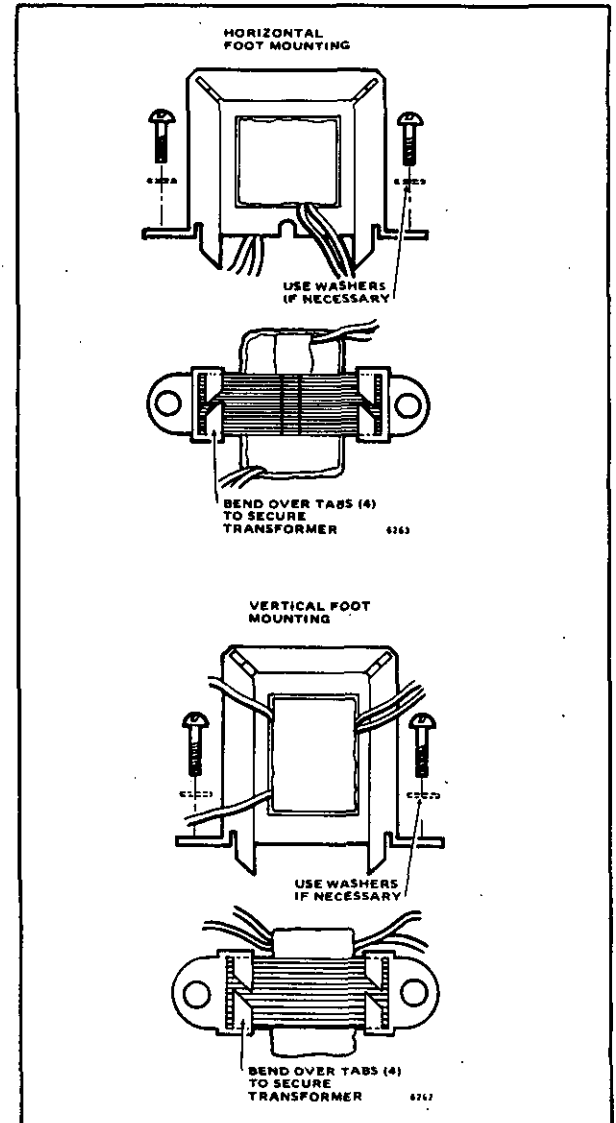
USE HORIZONTAL CHANNEL FRAME FOR HORIZONTAL FOOT MOUNTING; VERTICAL CHANNEL FRAME FOR VERTICAL FOOT MOUNTING.
